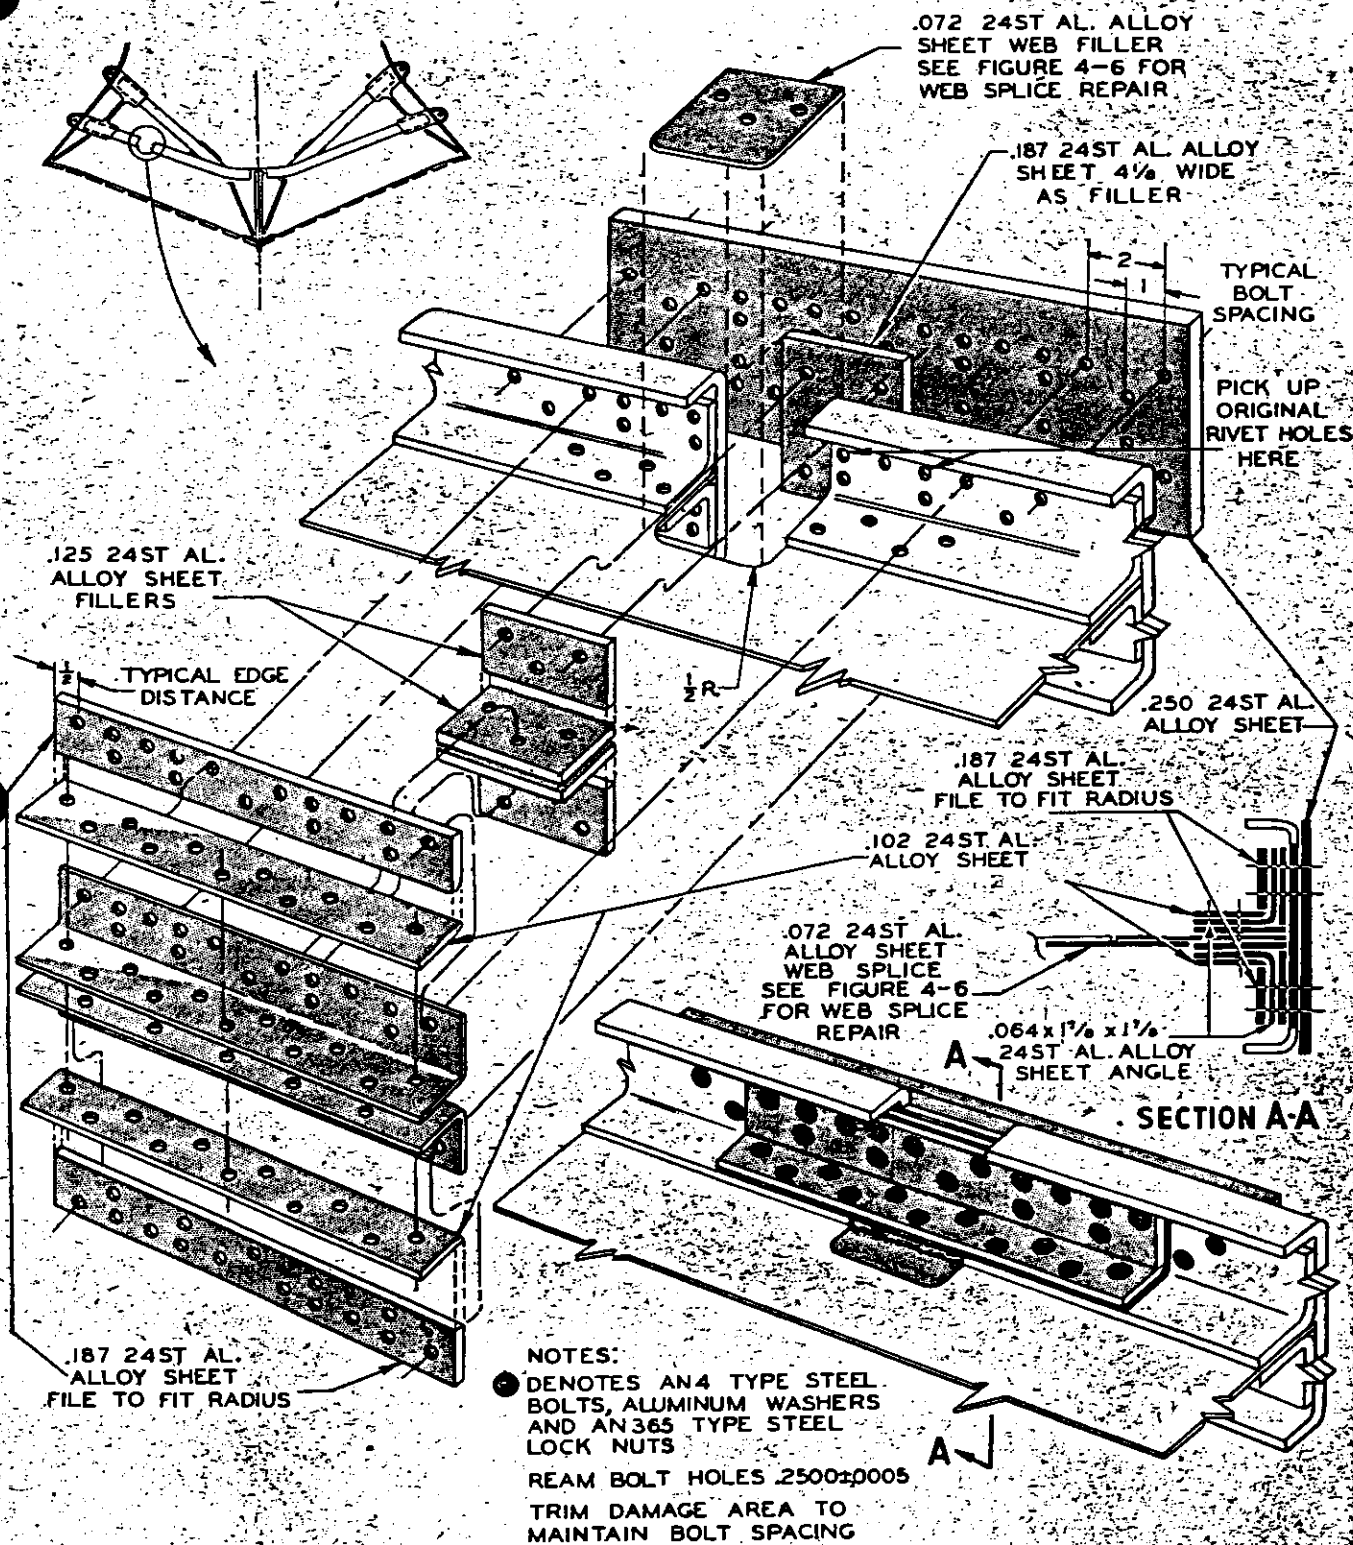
(Sheet 1 of 2 Sheets)—Beltframe 4.2 Repairs
